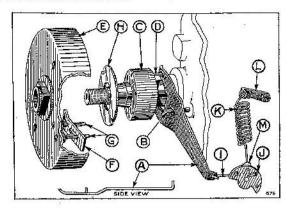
GOVERNOR ASSEMBLY AND HOOK-UP
